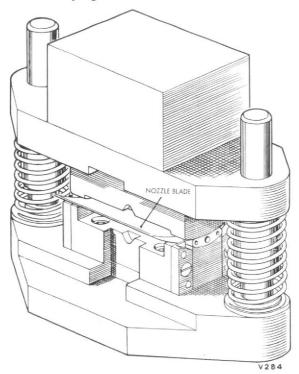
Nozzle blade in tool T.78208; reforming damaged lugs.
